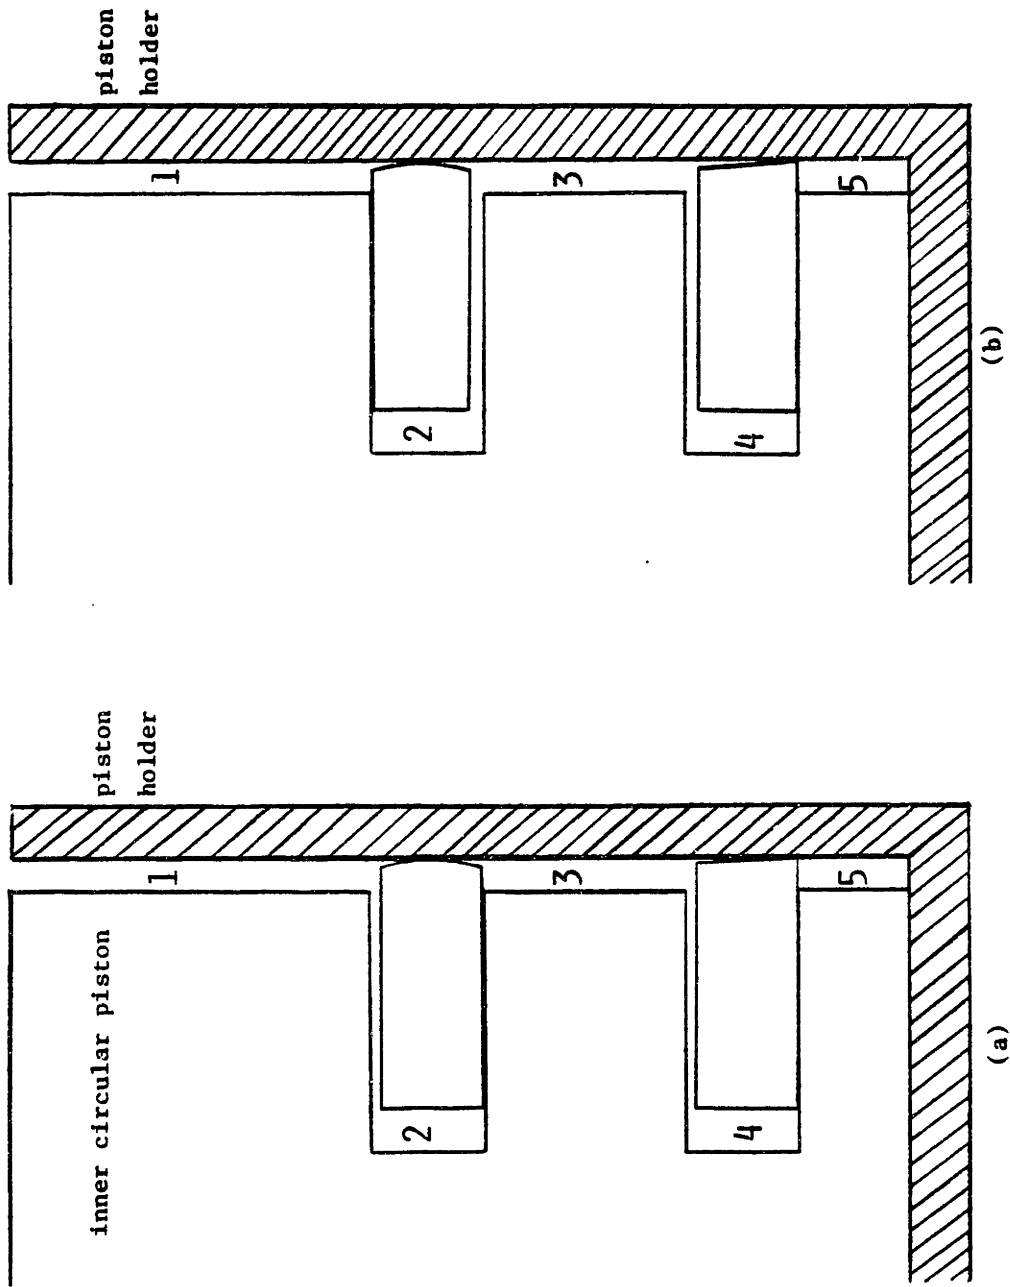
Schematic showing the model geometry and position of the inner circular piston rings of Fig 5.8.
